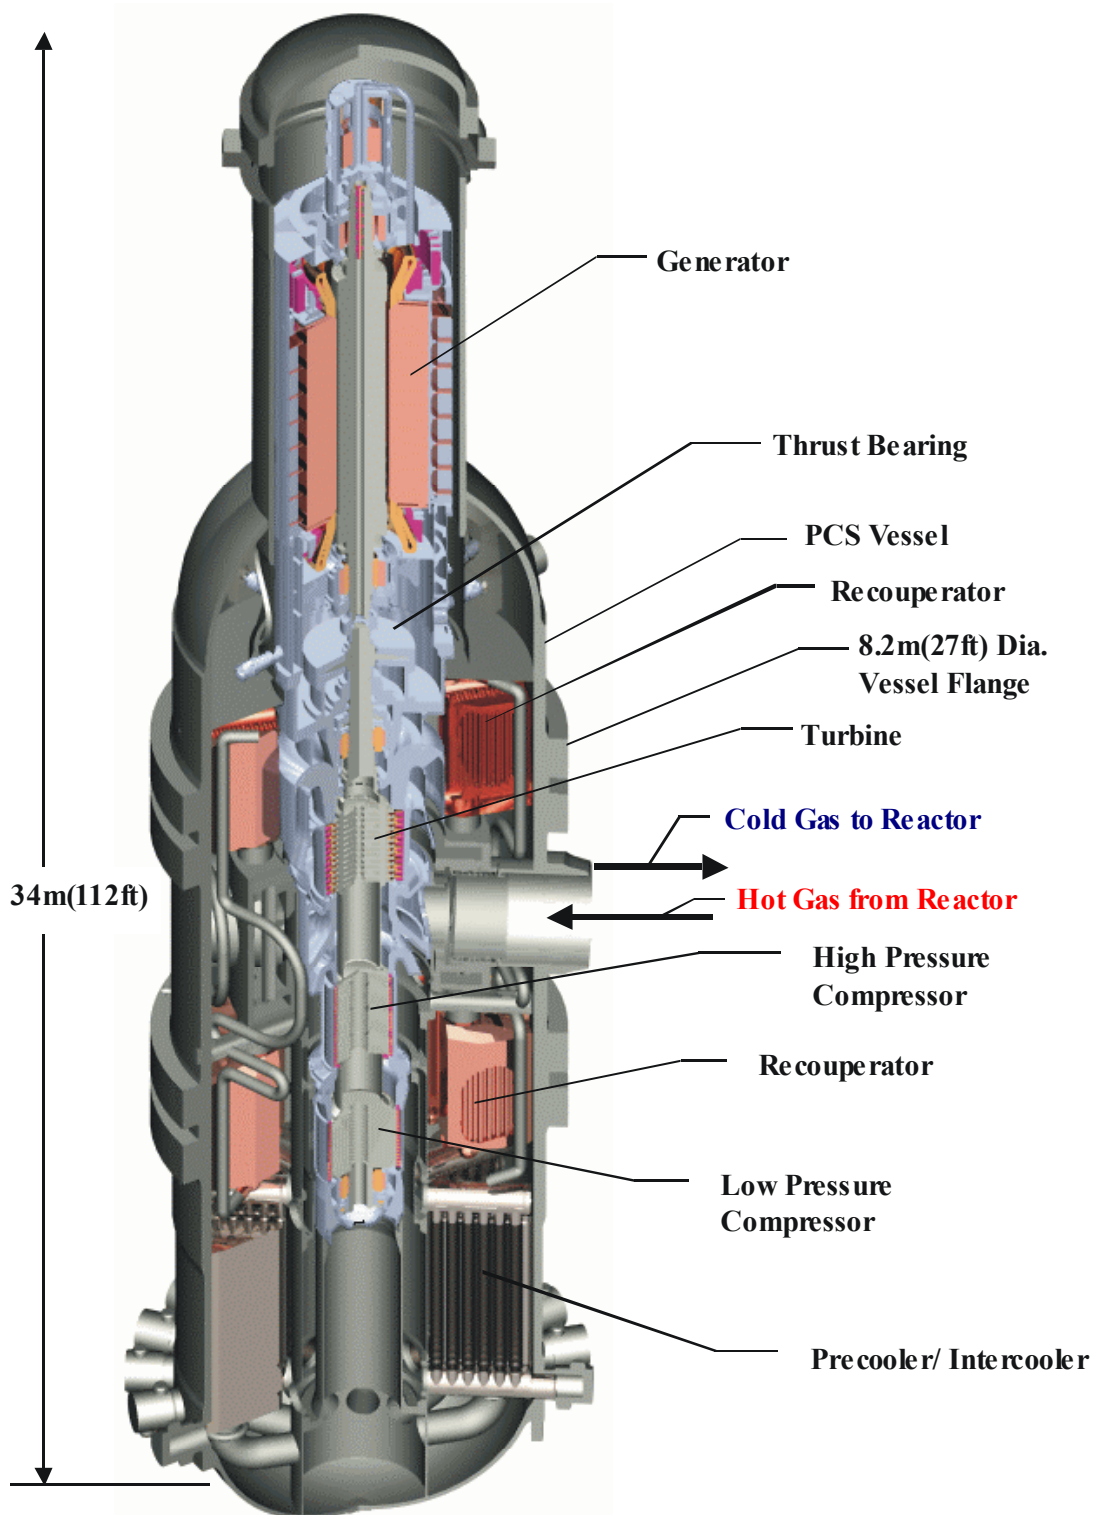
Power conversion unit (PCU) cutaway showing the turbomachine, recuperator, intercooler, precooler, and generator.
